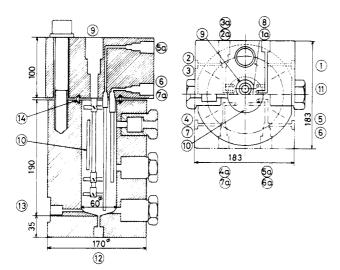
Equilibrium cell: 1, sample inlet; 2, pressure-gauge tap; 3, vent tap; 4, gas outlet; 5, liquid outlet; 6, gas inlet; 7, liquid inlet; 8, safty-valve tap; 9, magnetic pump; 10, thermowell; 11, circular window; 12, drain outlet; 13, liquid outlet; 14, titanium delta-ring. (The "a" denotes a valve seat.)
